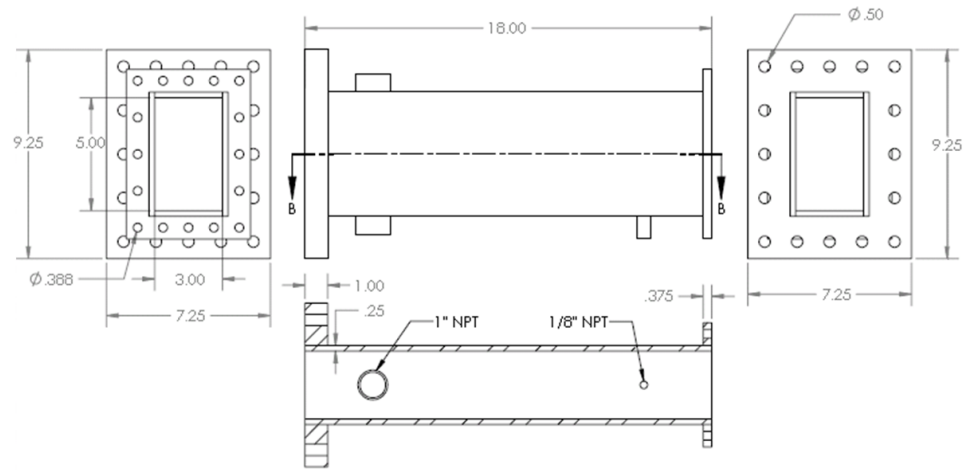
Schematic of the air dilution section, dimensions in inches
